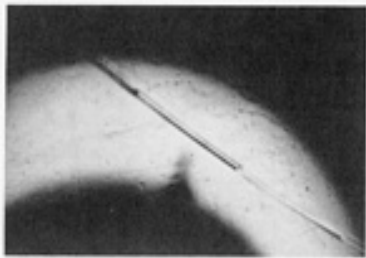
Plowing damage generated on the surface of a bearing ball. 11×
